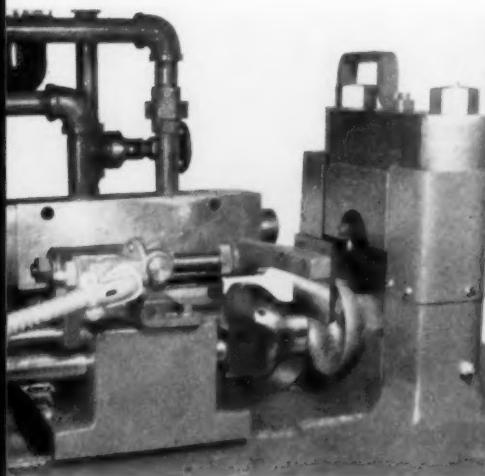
This illustration shows a machine setup which is particularly designed for use in flaring the end of a welded steel tube.
